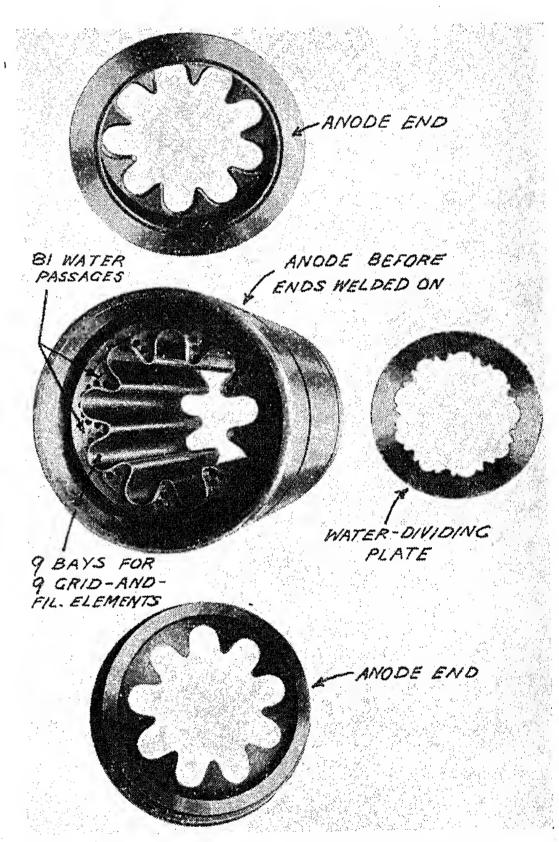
500-kW demountable valve: anode before the ends are welded on.
